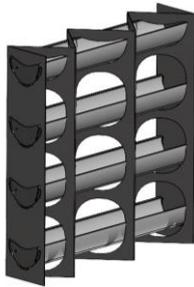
CAD Assembly - 0022-DE-CAD-007 – Planter
